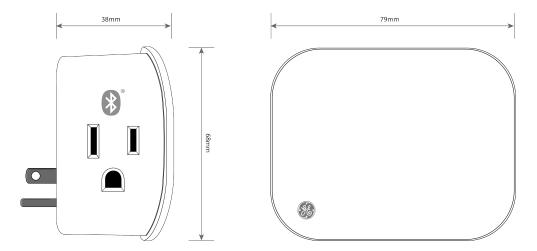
Avi-on Plug-In Dimmer and Switch Dimensions
